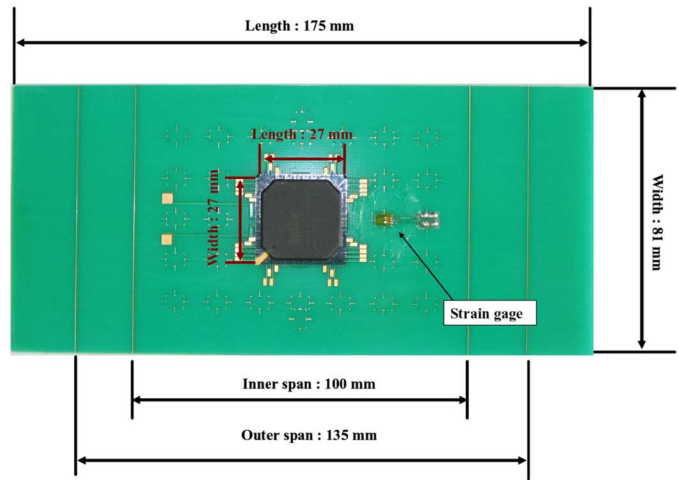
Specimen for four point bending test, where 256PBGA package is attached to the PWB board.
